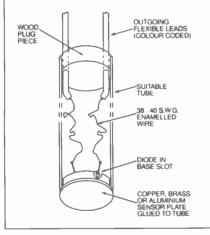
General probe assembly details. The tube can be an old plastic pen barrel or a piece of paxolin tubing.
